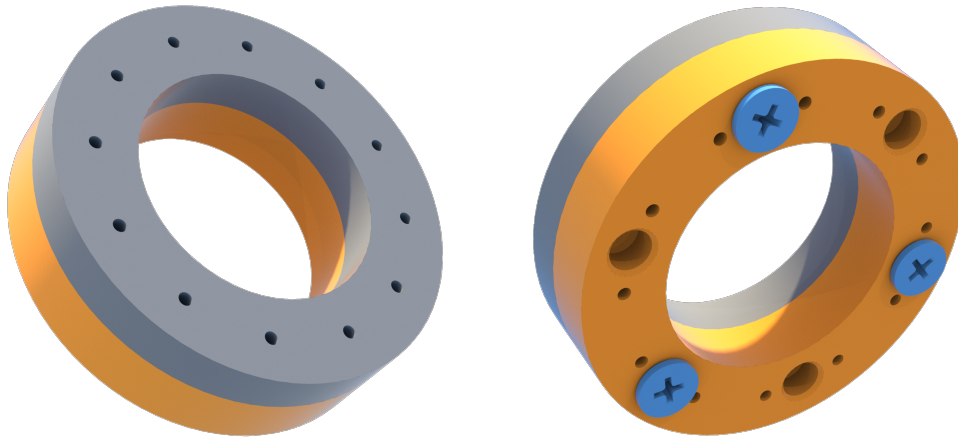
Anode with a Tungsten face plate (left) and Copper body with mounting holes for Copper threaded rods (right)
